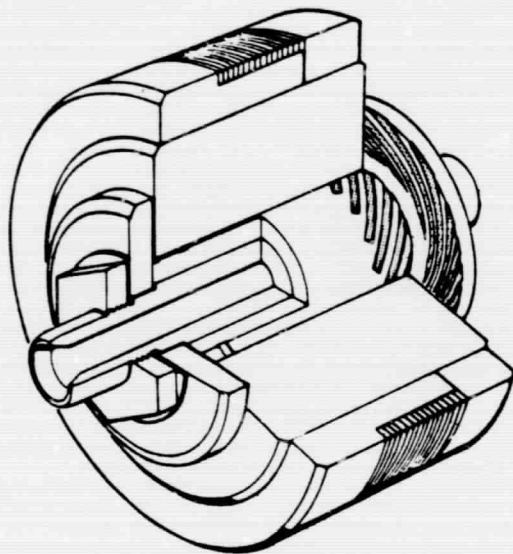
18 IRIG Mod B gas-bearing wheel assembly.
